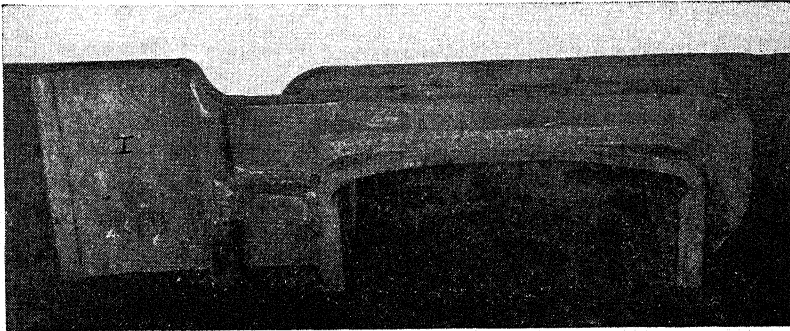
Locomotive guide yoke fabricated by arc welding of 2½ inch bloom steel.
